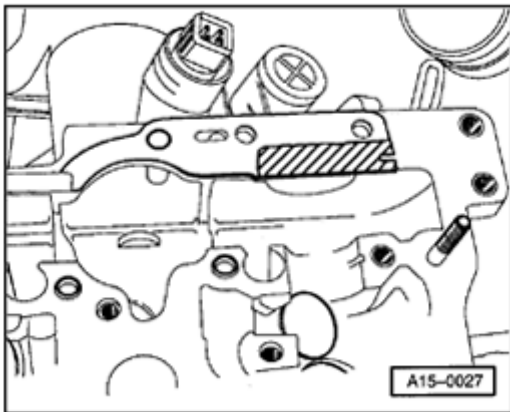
Replacing Rubber/Metal Camshaft Adjuster Gasket And Spreading Thin Layer Of Sealant On Hatched Surface
